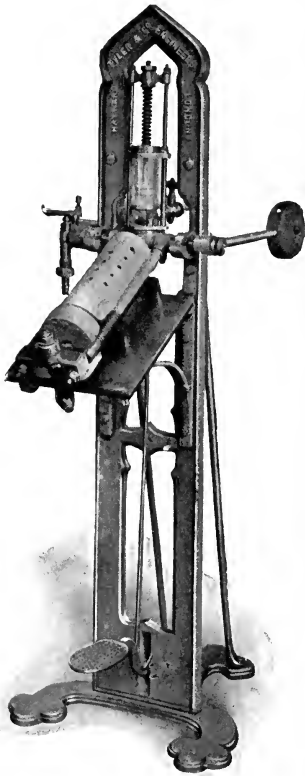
Swing-Filling Machine for Codd's Bottles.
